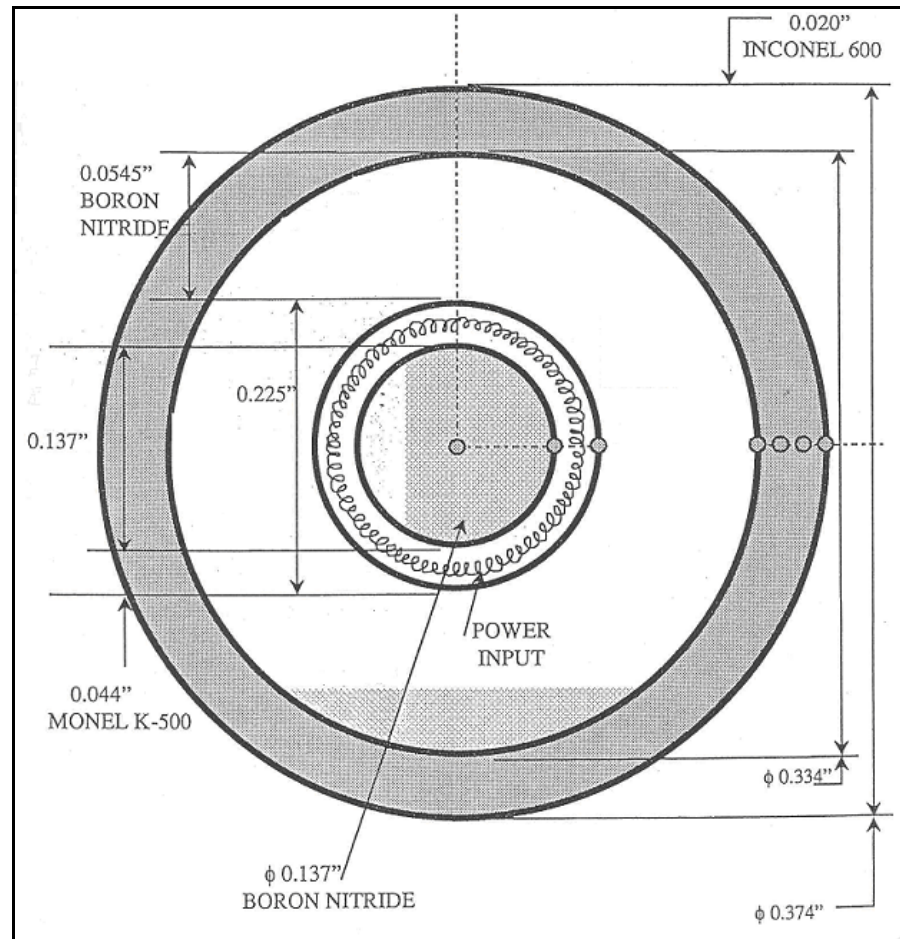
Geometry, Materials and Dimensions of RBHT Heater Rod
